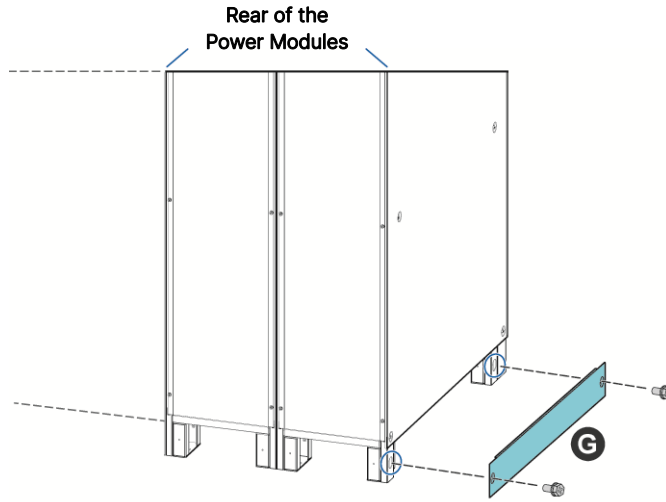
1250kVA UPS _ Install the Rodent Shields at the bottom of Two Sides
